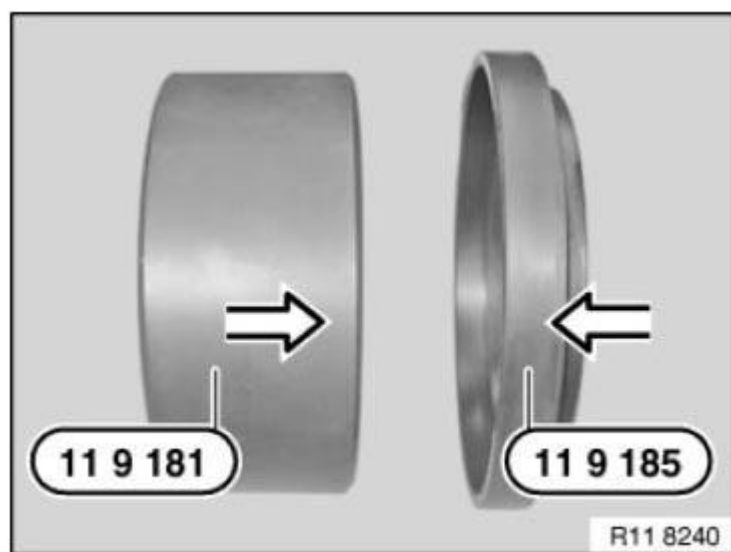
Connecting Special Tool 11 9 185 To Special Tool 11 9 181
